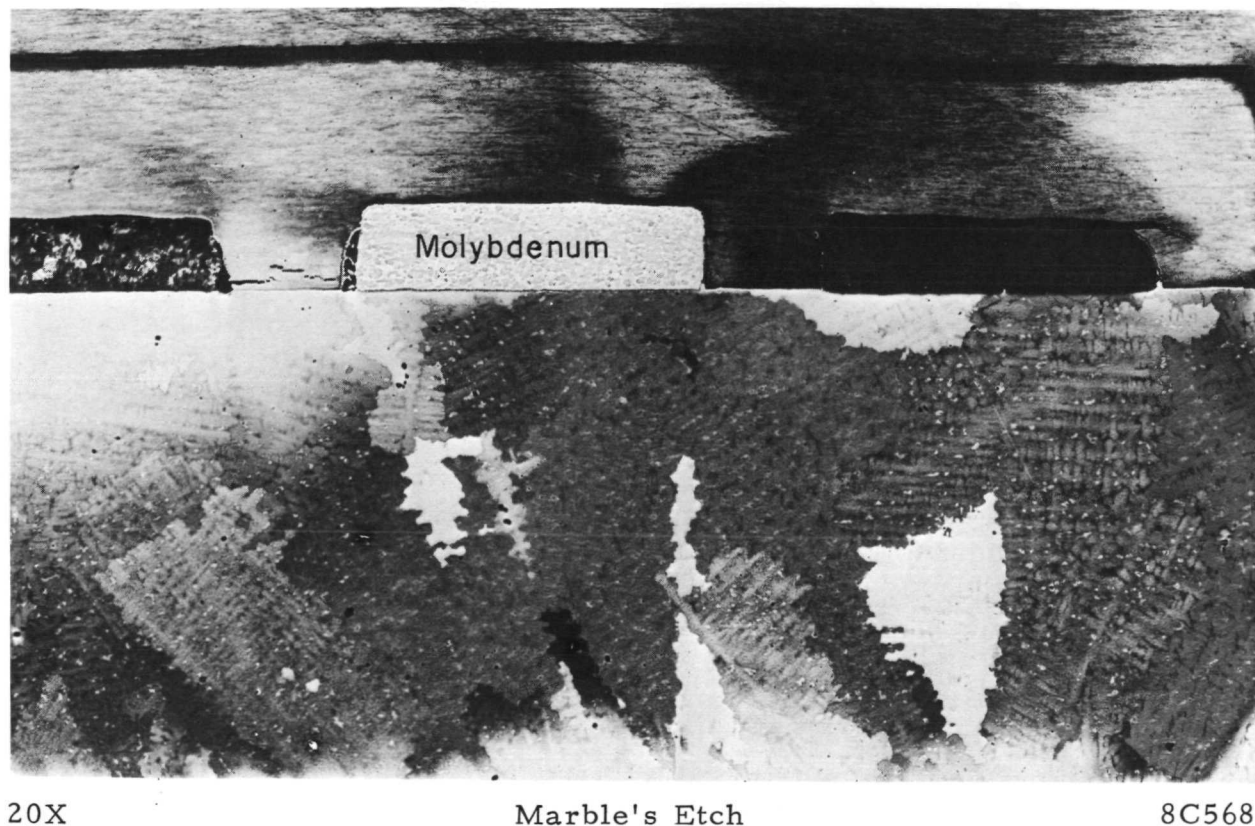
CRACKED TD NiCr ZONE M FIN IN SPECIMEN T-23 CAUSED BY MOLYBDENUM TOOLING
